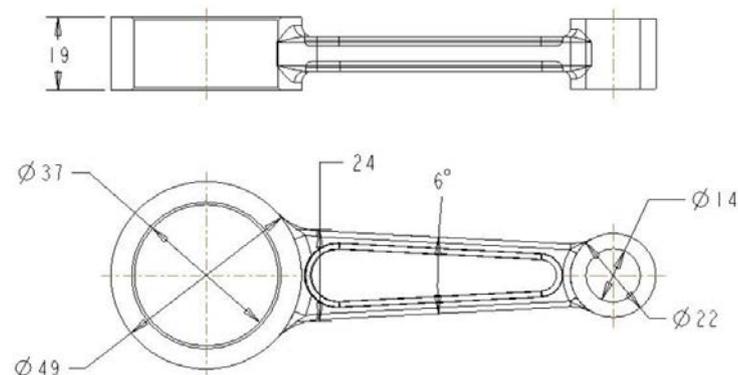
Structure of a connecting rod with its specified dimensions [6].
